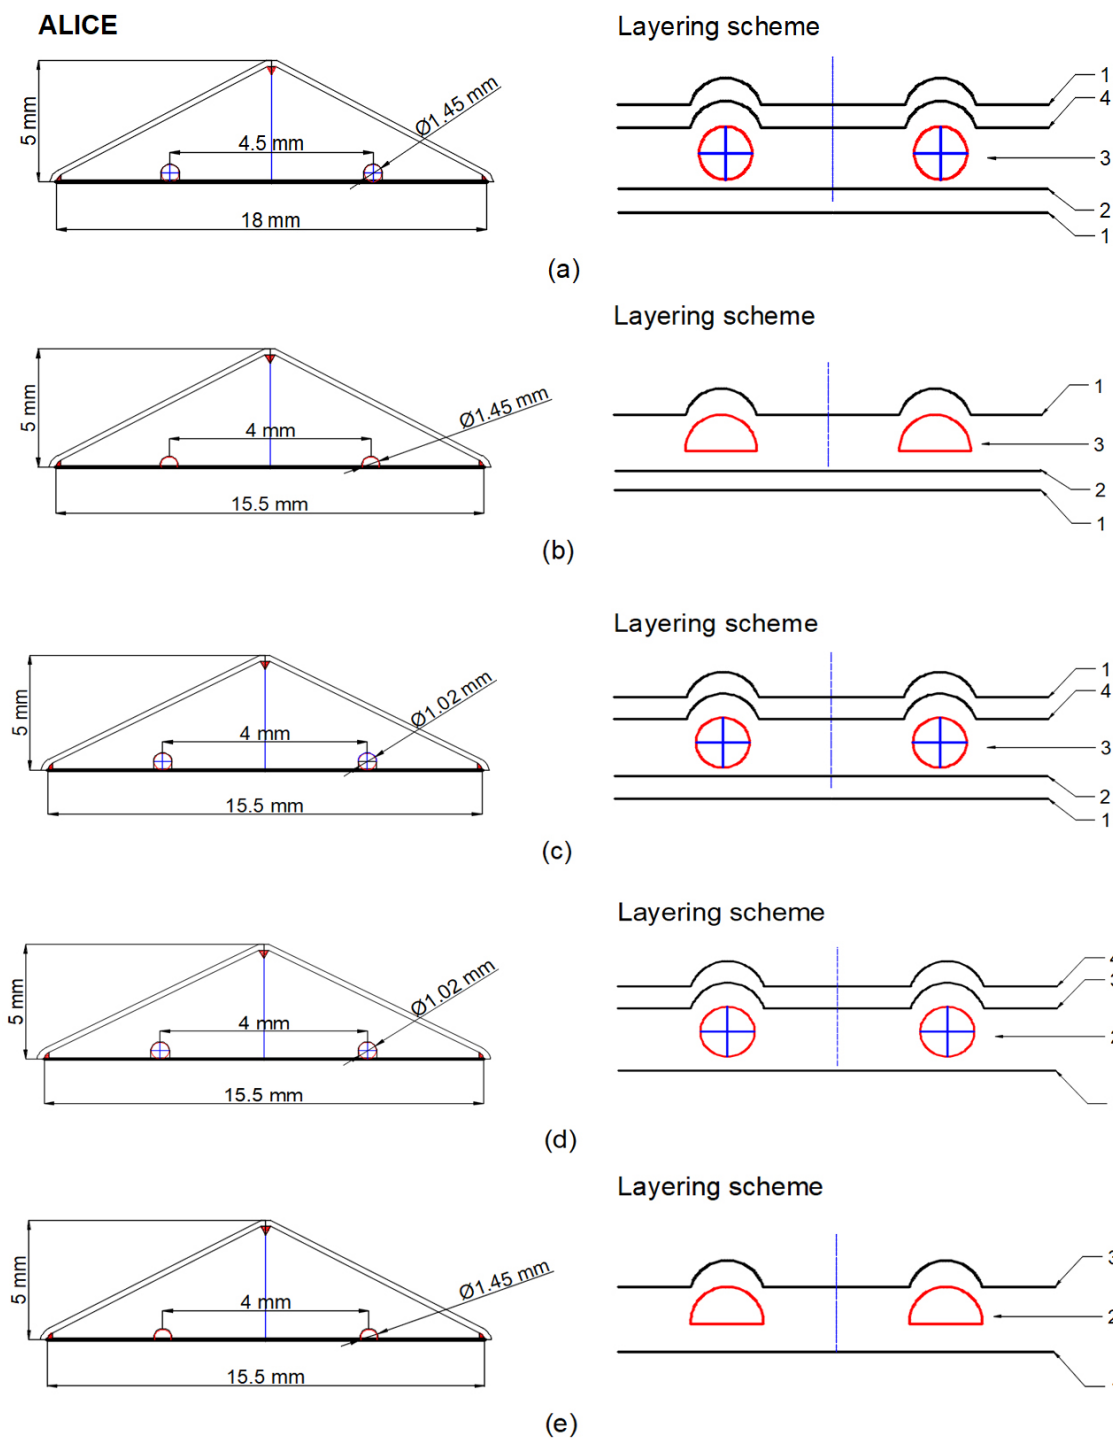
Figure 2. Layout of the investigated samples of ultra-lightweight space support structures with integrated liquid cooling system. Left: cross-section of the Cold Plate and Space Frame. Right: schematic layout (exploded view). (a) Sample 1; (b) Sample 2; (c) Sample 3; (d) Sample 4; (e) Sample 5. For more information see the text.
